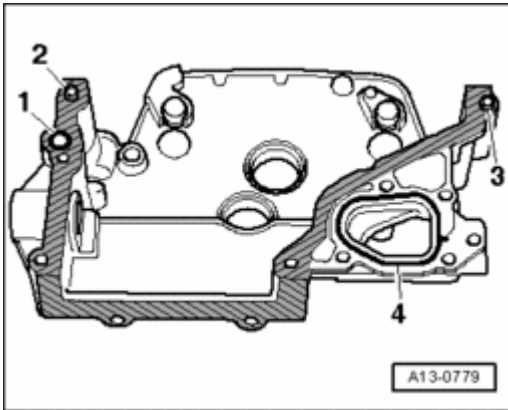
Checking Dowel Sleeves And Are Inserted In Upper Cover For Camshaft Timing Chain
